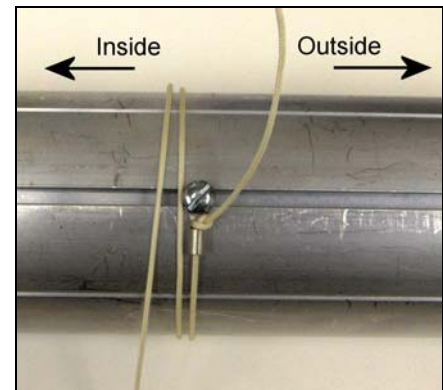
Cord Wrapped on 2 $\frac{3}{4}$ " Tube
